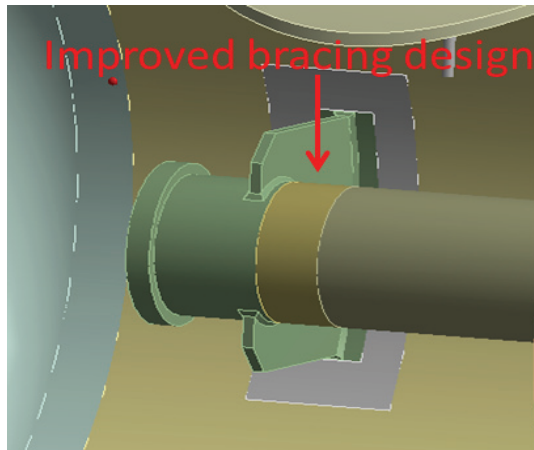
Improved bracing design of the choke tubes of the suction dampers
